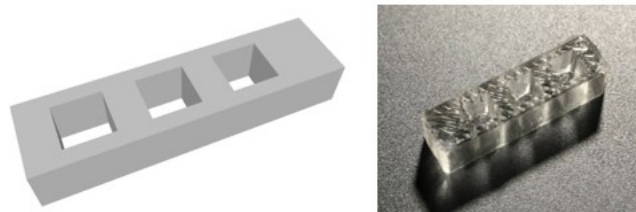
PDMS square well: 3D drawings (left) and baked device (right).
